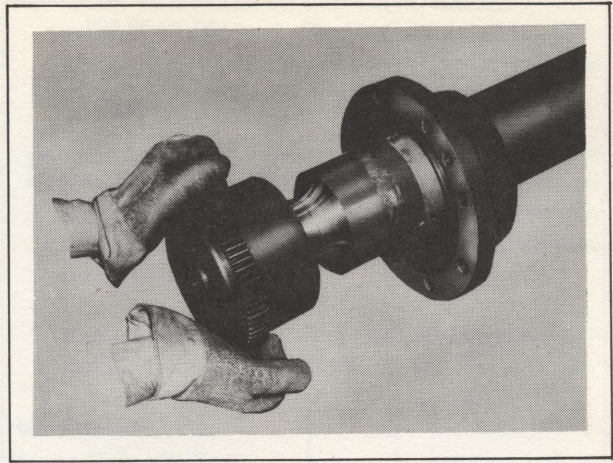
APPLYING HEATED COUPLING HUB TO COMPRESSOR DRIVESHAFT.
